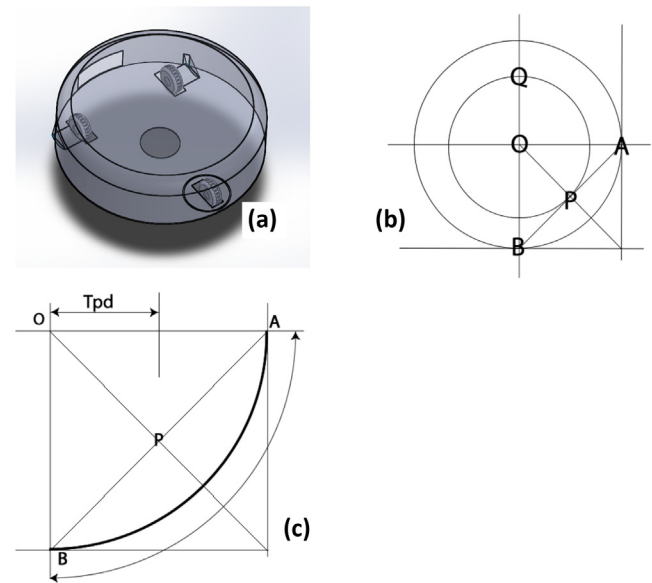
(a) 3D image of the wheel system, (b) & (c) layout of the wheel system.
